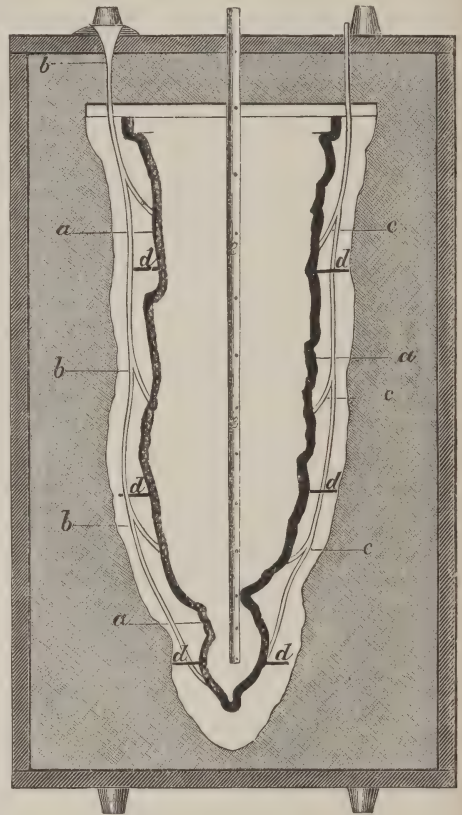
Perpendicular Section of Mould. *a, a, a*, Hollow mould. *b, b*, Channel in the cope for pouring the metal. *c, c*, Channel for discharging gases. *d, d, d, d*, Iron supports for holding core in place. *e, e*, Air tube in core.
